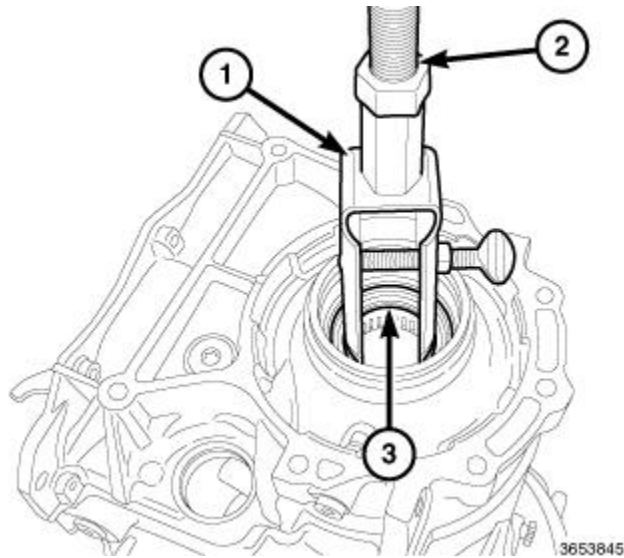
Bearing Cup, Slide Hammer, Universal & Oil Dam
